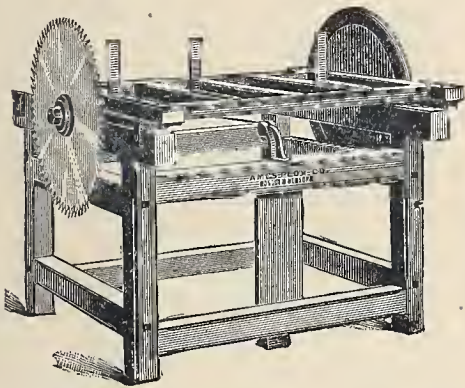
Portable Circular Saw Machine with Sliding Table.
